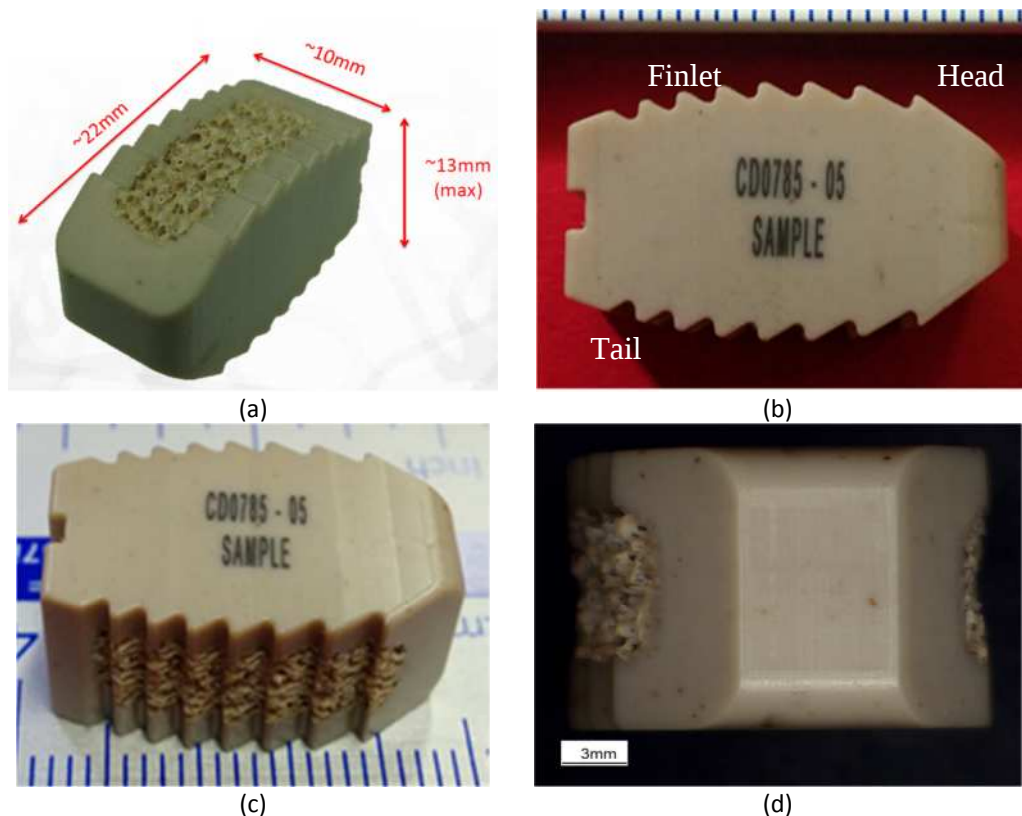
Prototype spinal cage employing porous and moulded PEEK showing (a) its dimension, (b) the lateral view, (c) the 60° angle view and (d) the head view.
